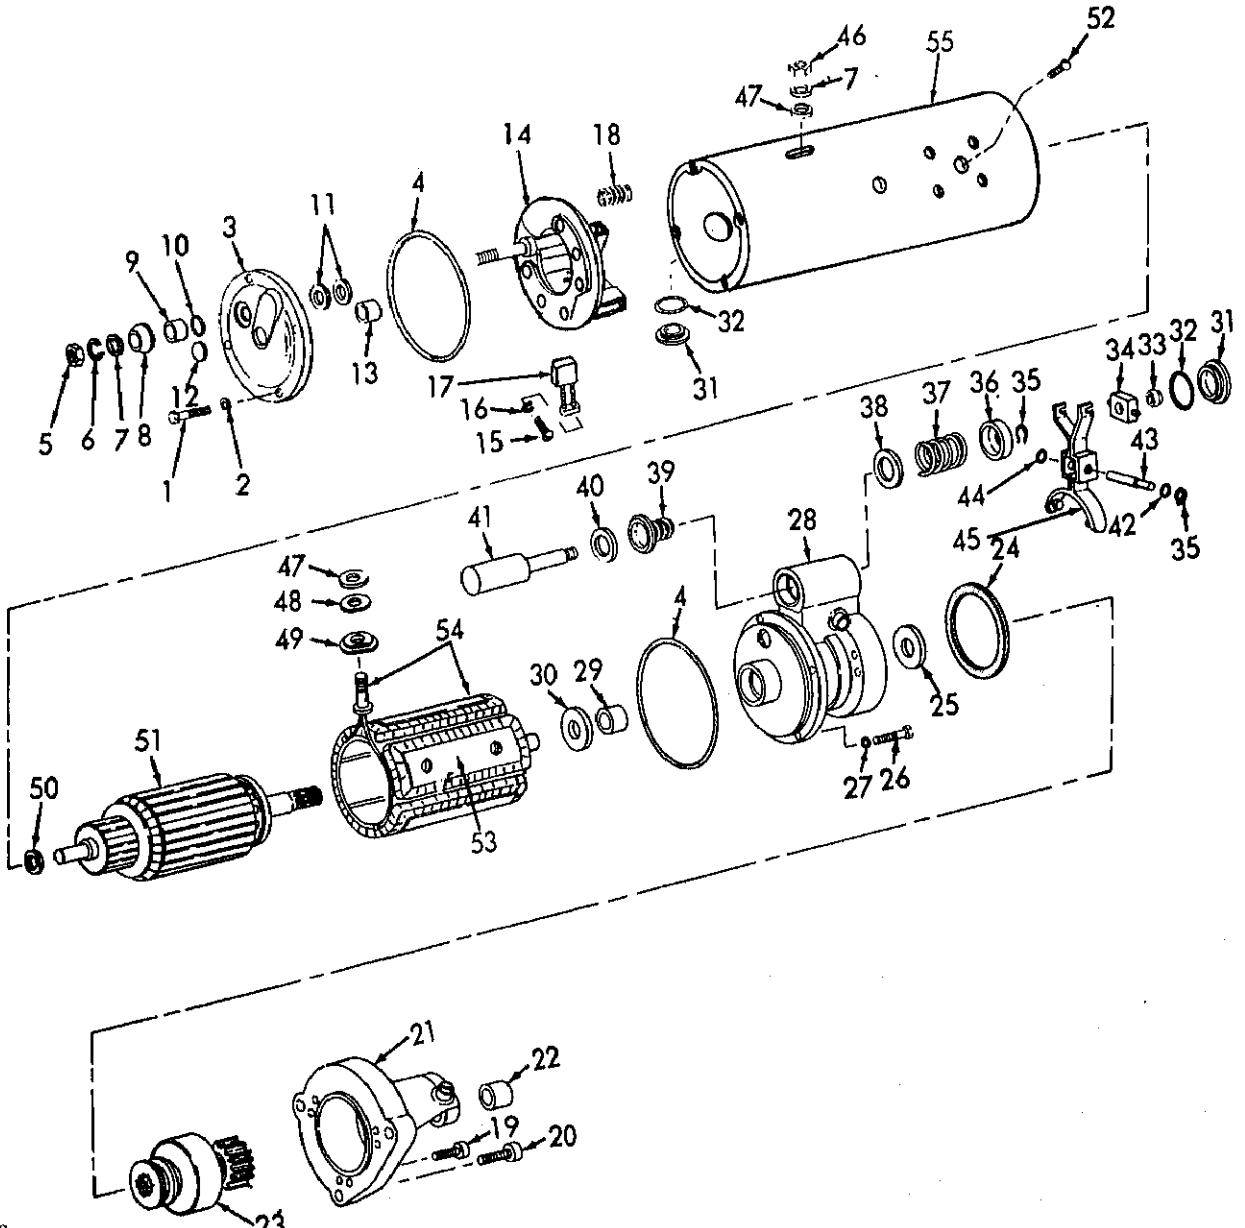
Starter and solenoid, removal, disassembly, reassembly, and installation (sheet 1 of 2).
